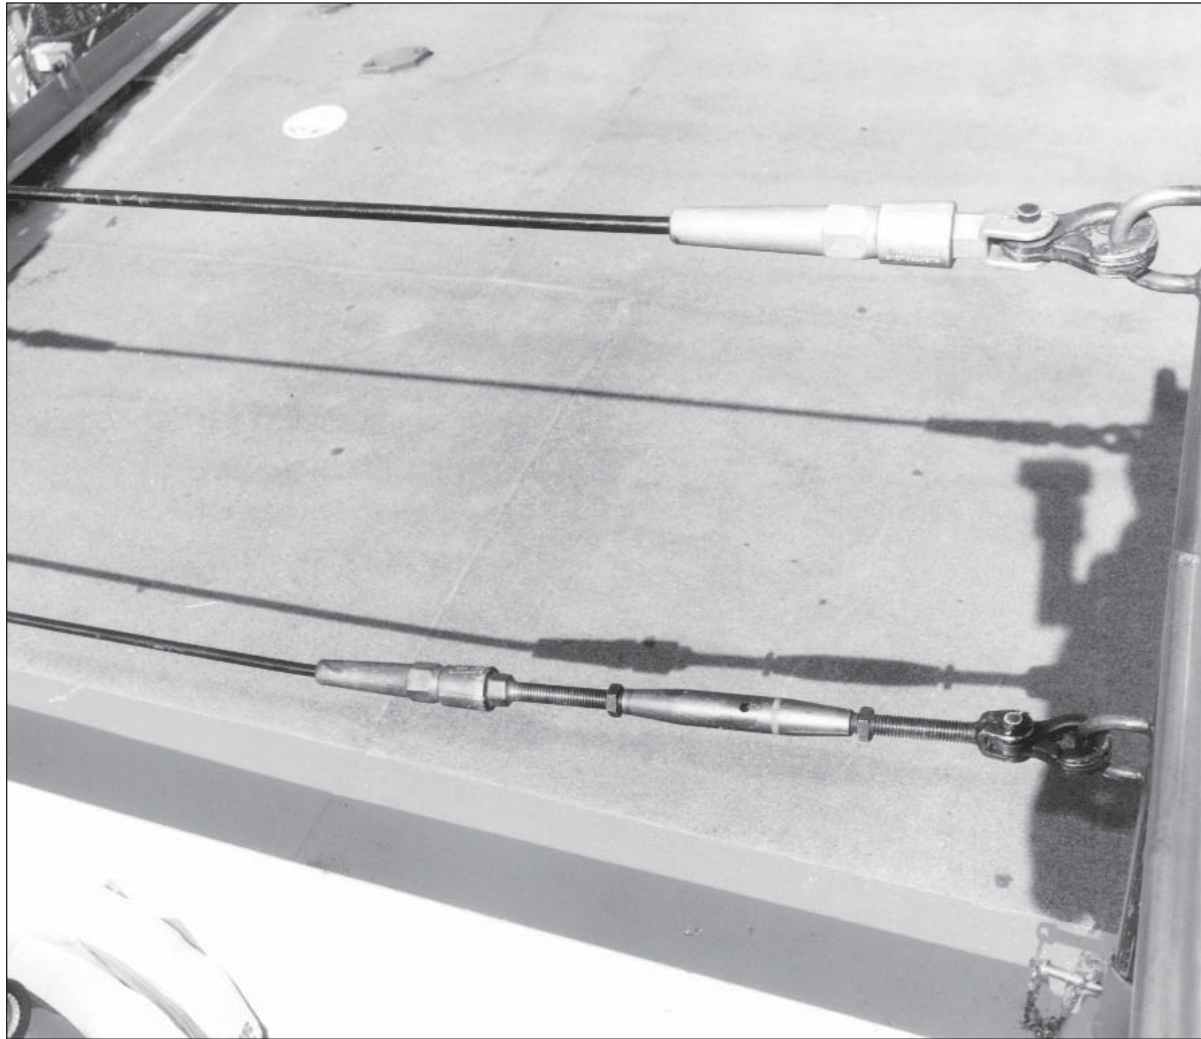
HALIFAX Class Guardrail End Fittings
